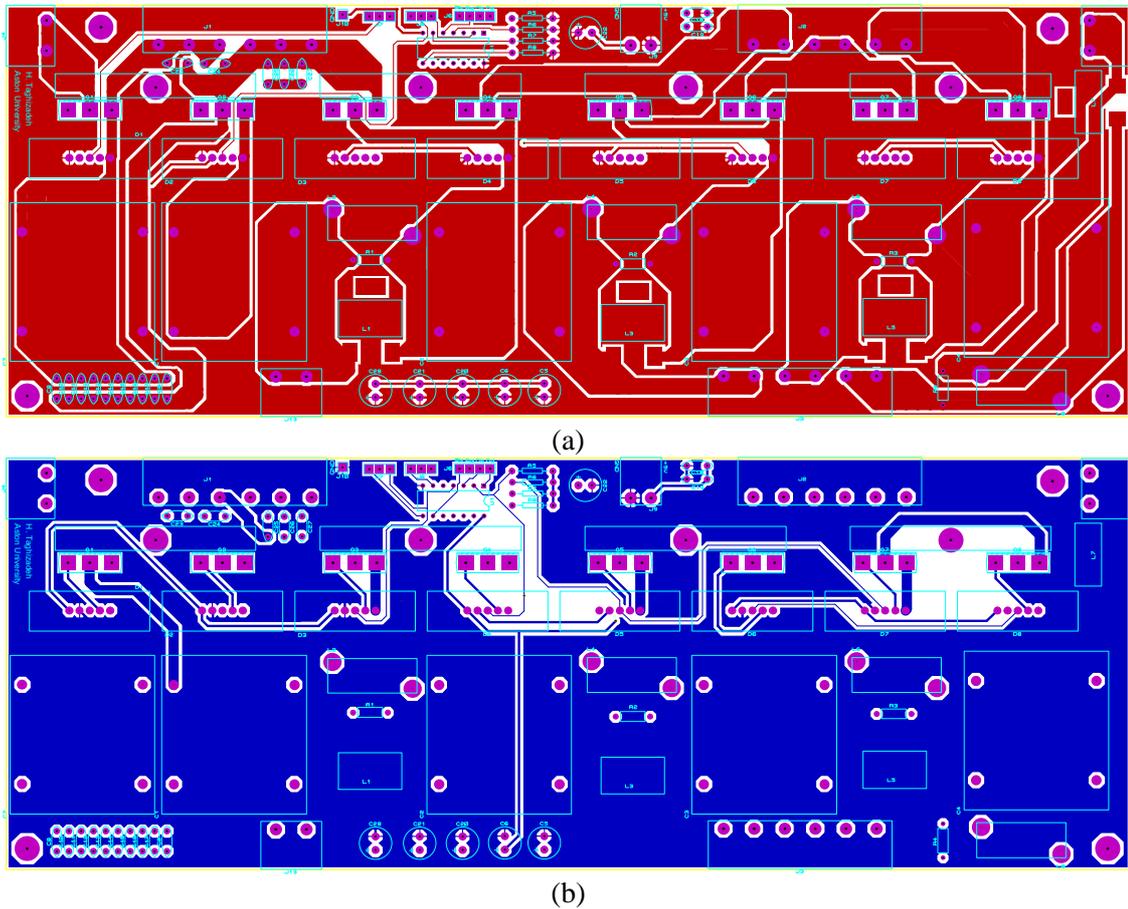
PCB layout for each leg, a) Top layer and b) Bottom layer
